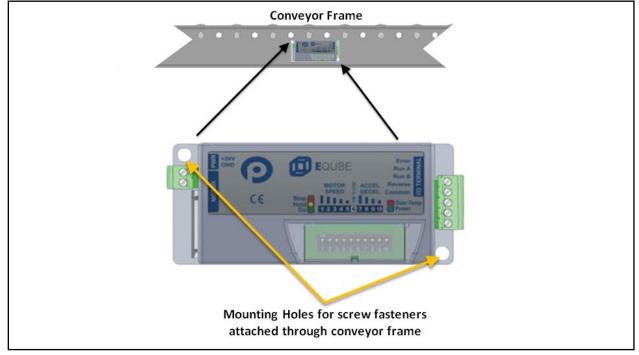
EQUBE ATTACHMENT TO CONVEYOR FRAME
